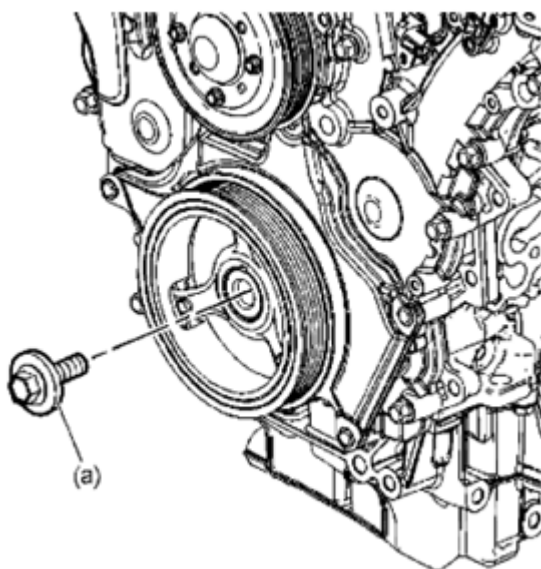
Installing Crankshaft Pulley To Crankshaft
